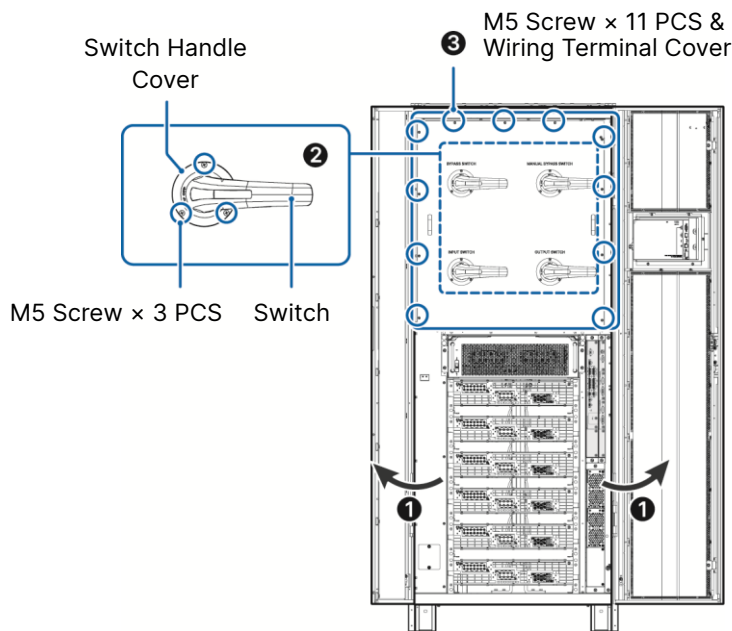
Remove the Switch Handle Cover, Switch and Wiring Terminal Cover
